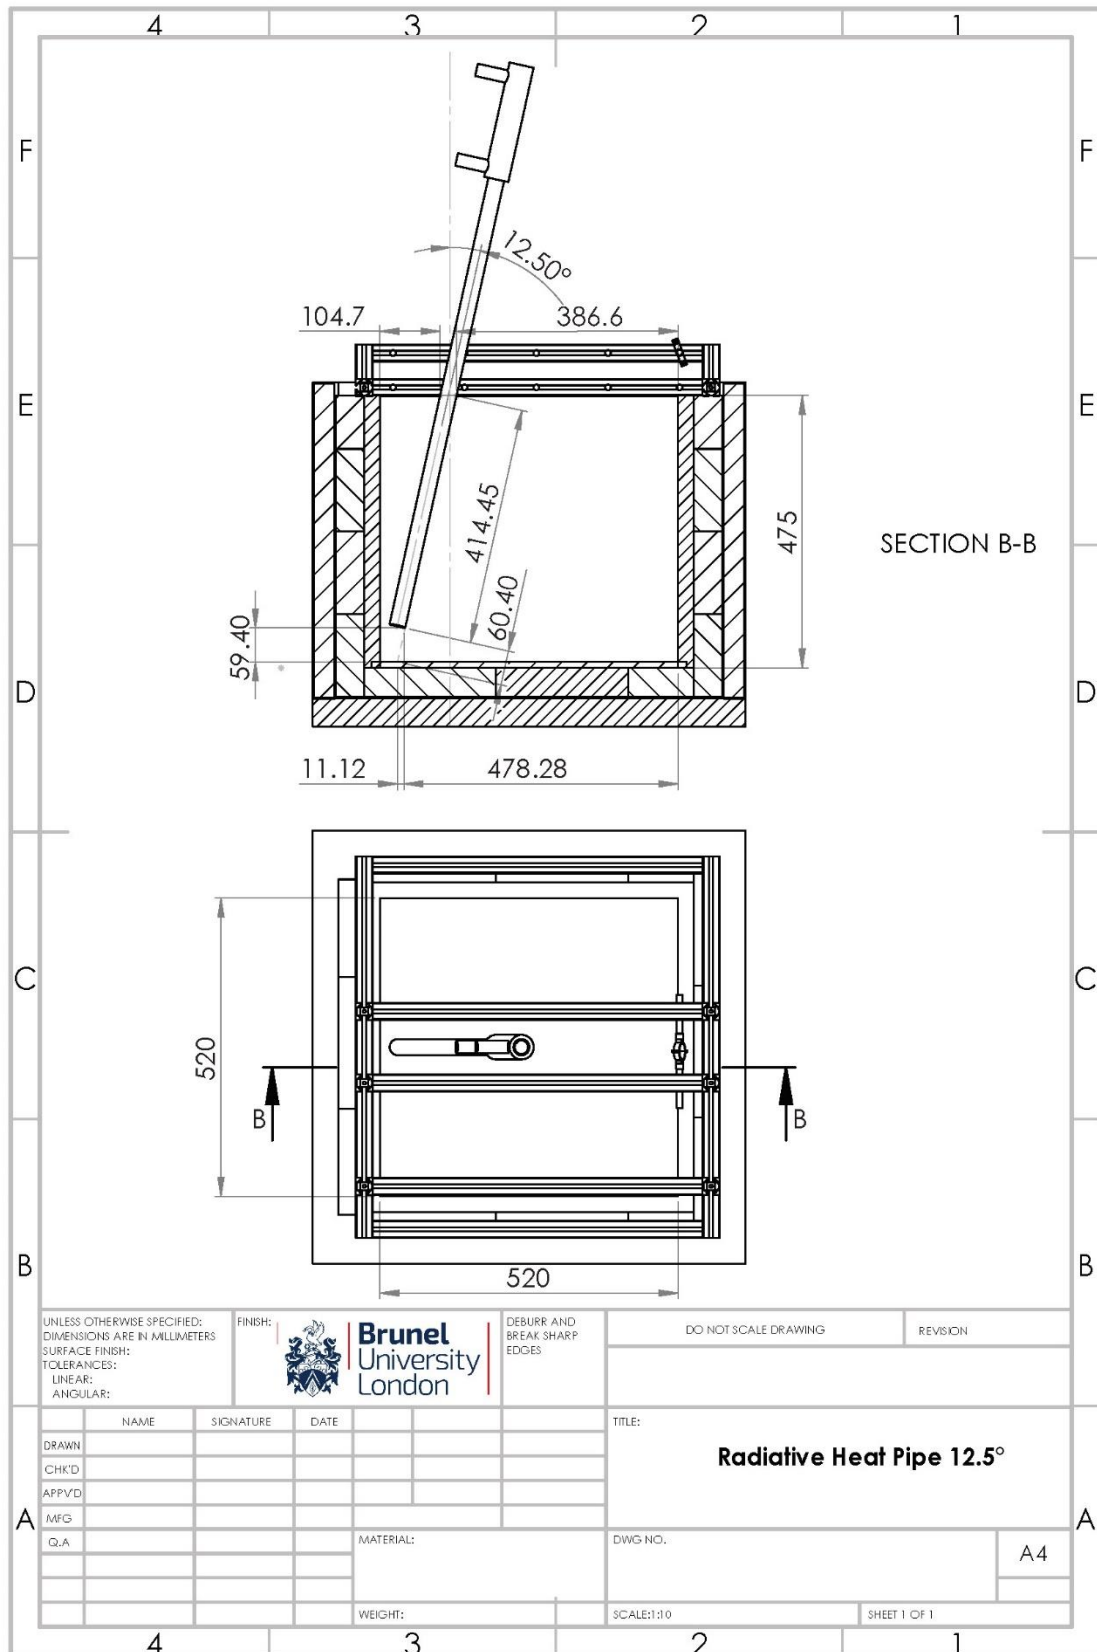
Two-dimensional drawings of the single heat pipe at 12.5° inclination test
